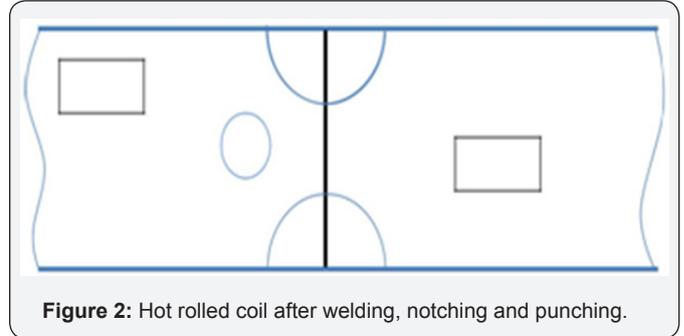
Hot rolled coil after welding, notching and punching.
